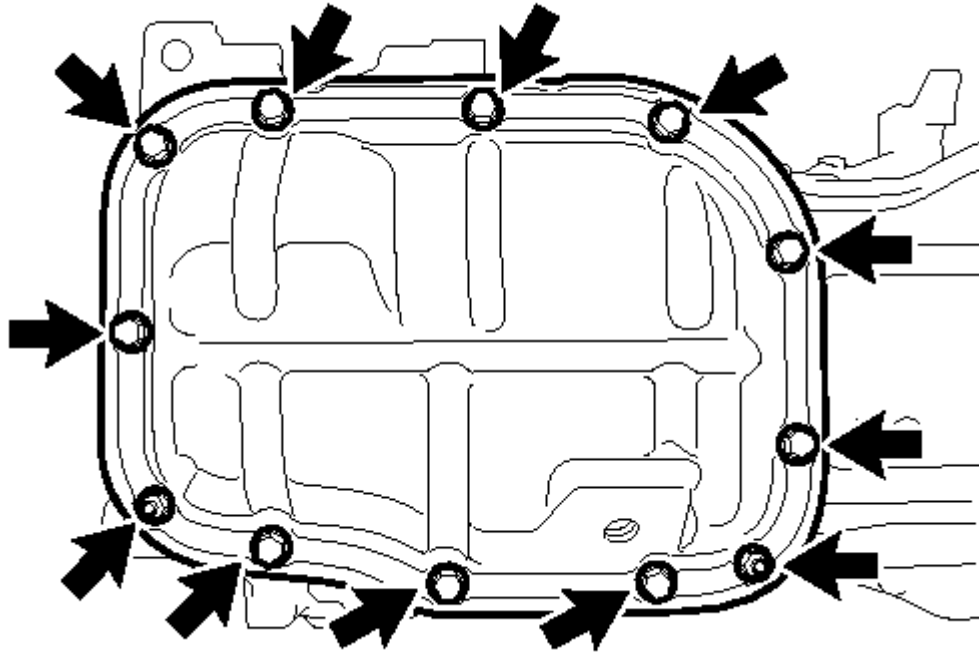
Identifying No. 2 Oil Pan Sub-Assembly Bolts
